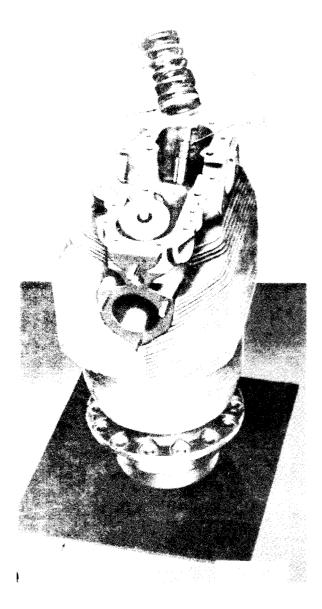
Removing or installing value springs, upper retainers, and exhaust value rotor.
